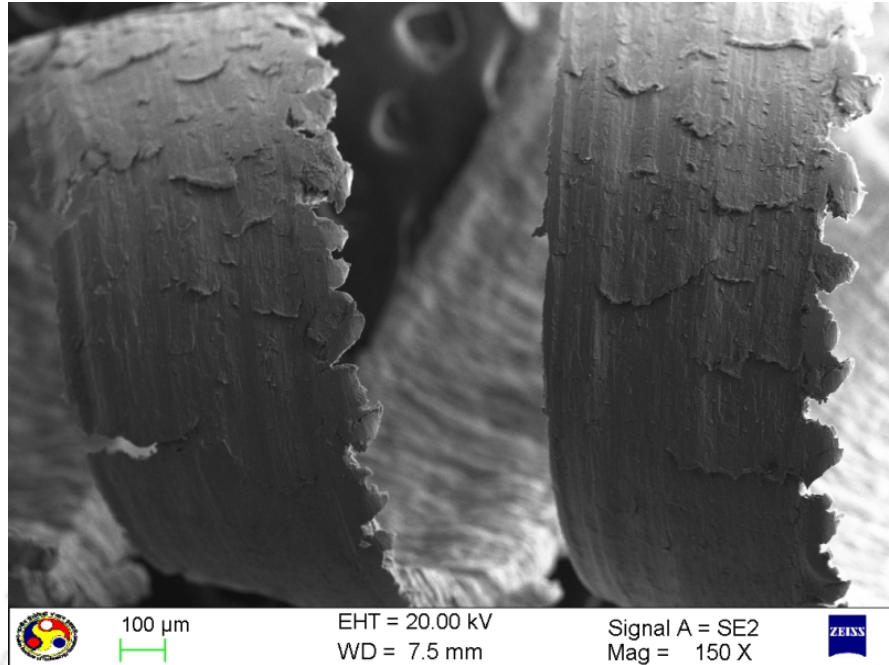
(b) Back surface of the chip produced by the WC-Co-5 wt.% CaF₂ cutting tool
